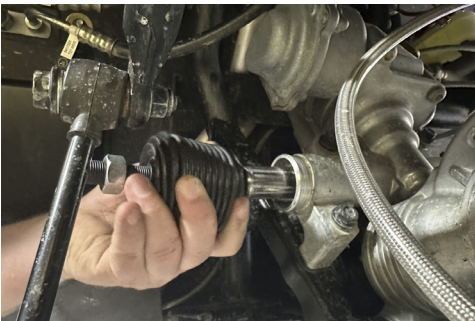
Fasten Inner Tie Rod to steering rack using Channel Locks
